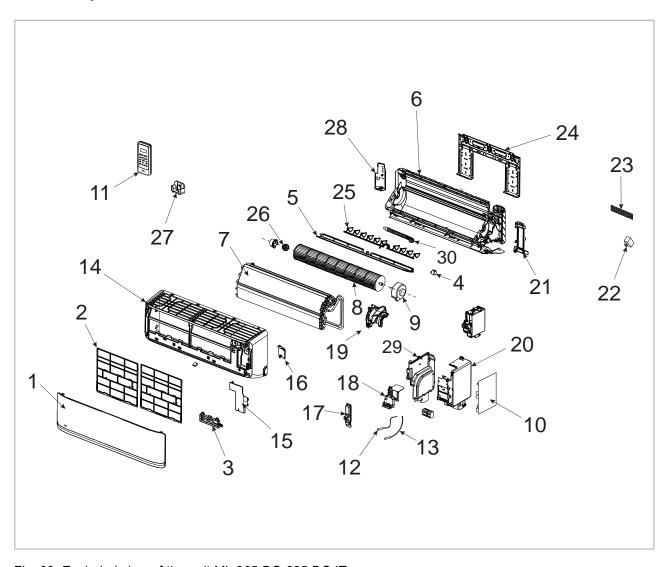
Exploded view of the unit ML 265 DC-685 DC IT
